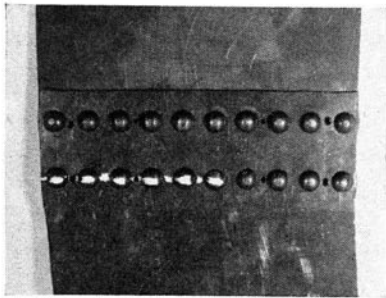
FAILURE BY SHEET TENSION; DOUBLE-STRAP BUTT JOINT WITH SINGLE ROW OF RIVETS ON EACH SIDE OF JOINT, SPECIMEN CDC-71
